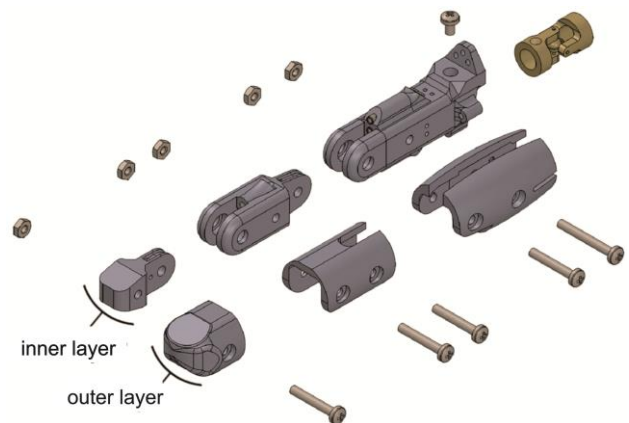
Finger components: inner layer, outer layer, screws and nuts, joint
